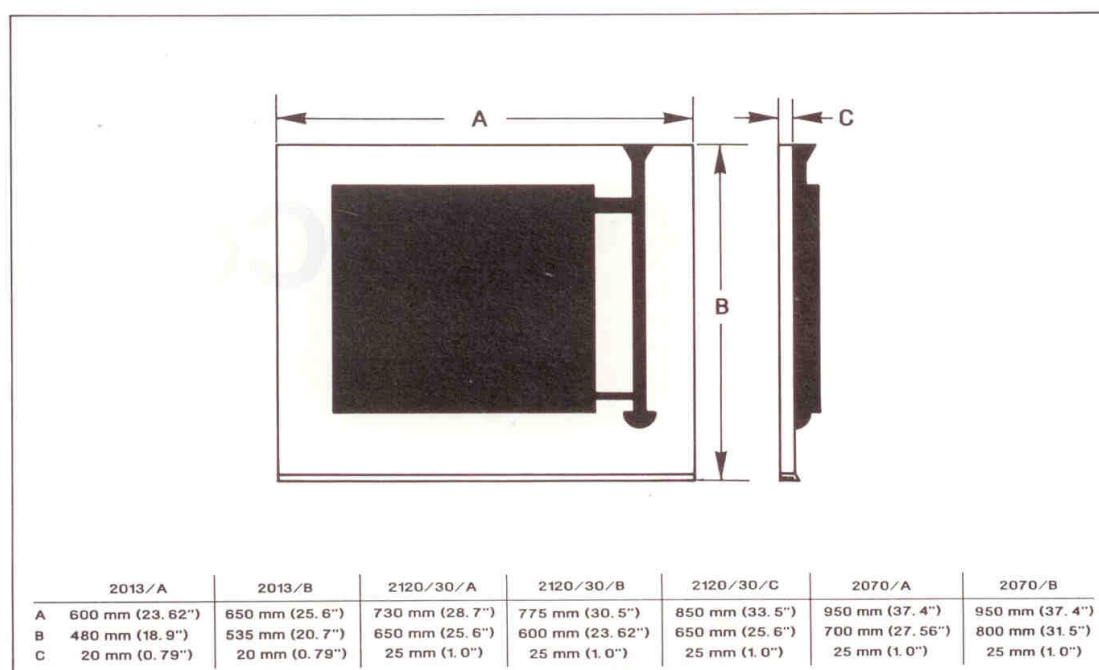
Standard pattern plate. Overall dimensions for different DISAMATIC molding machines.
